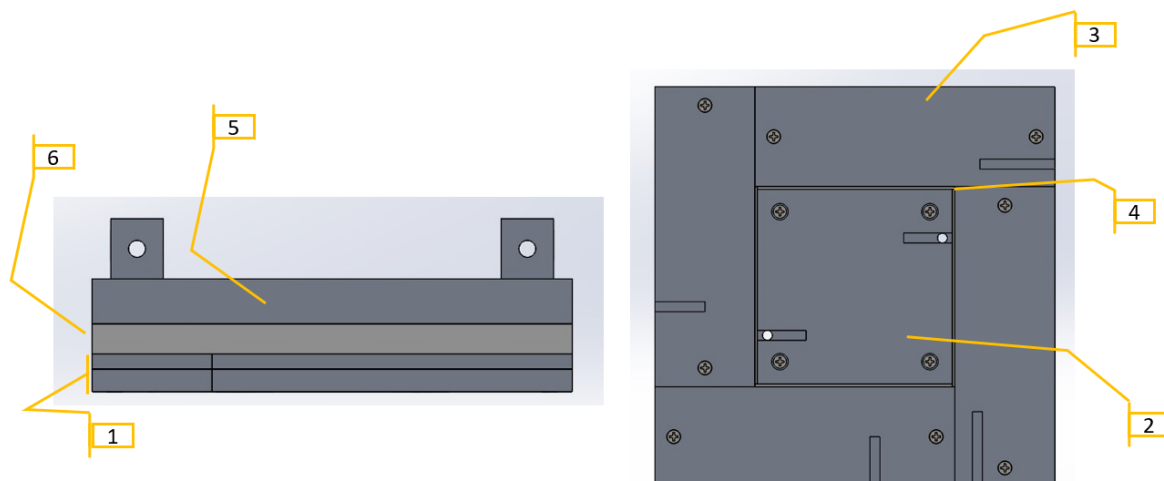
Side (left) and bottom (right) side of the hot plate assembly.
